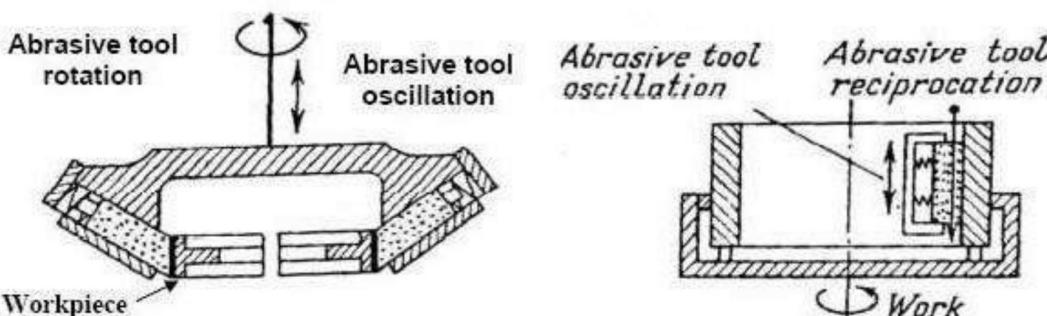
Abrasive tool rotating and surface oscillating about a stationary work piece
